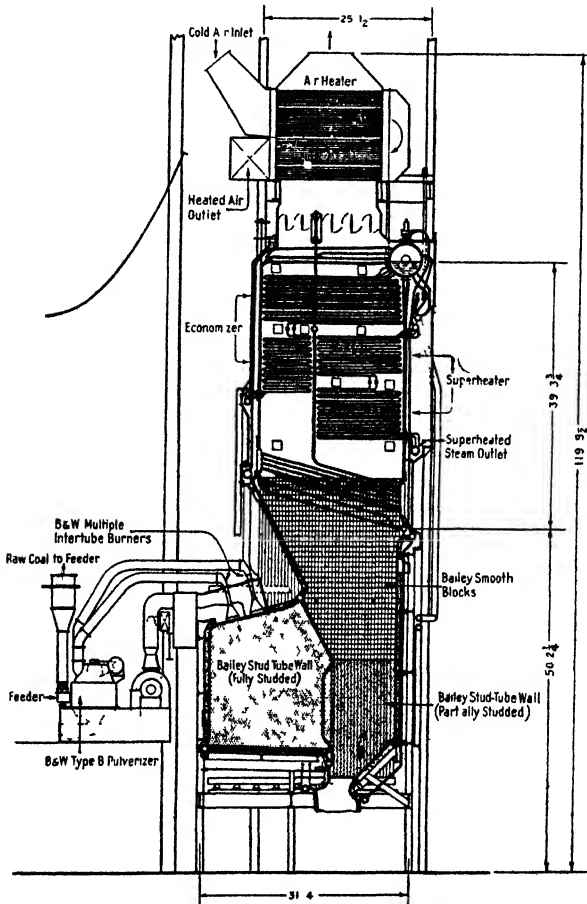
Babcock and Wilcox single-pass boiler with superheater, air heater and economizer
